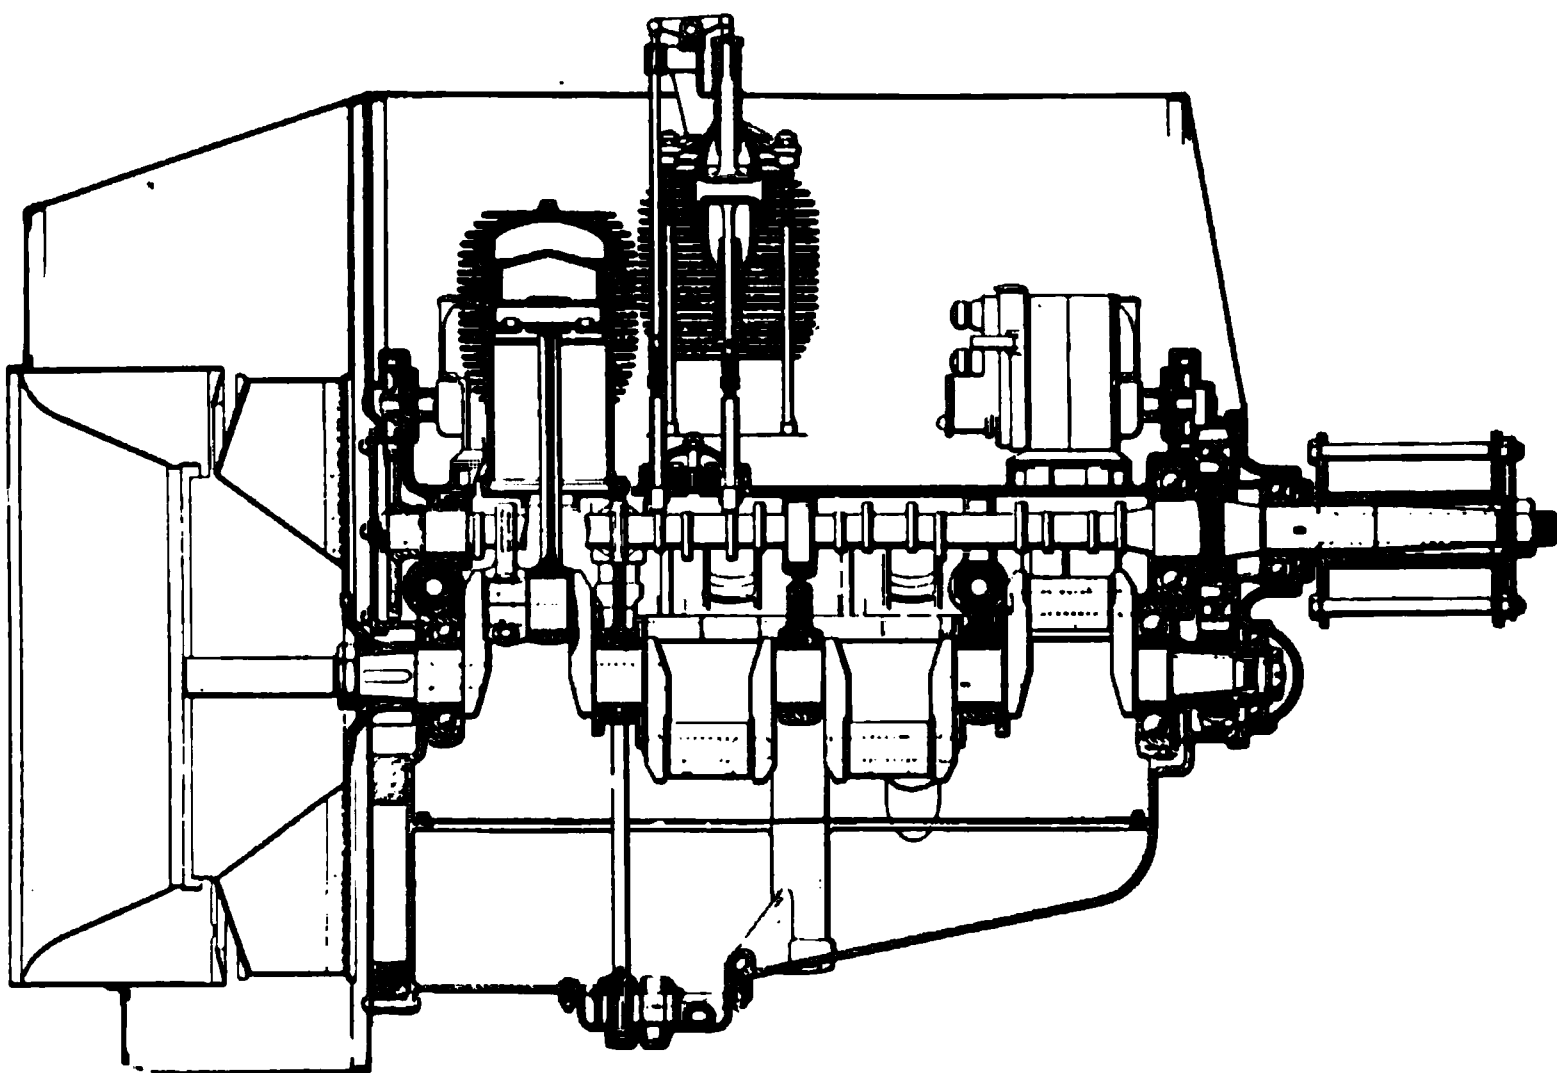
Longitudinal Section of 70 and 75-h.p. Renault Engines.
